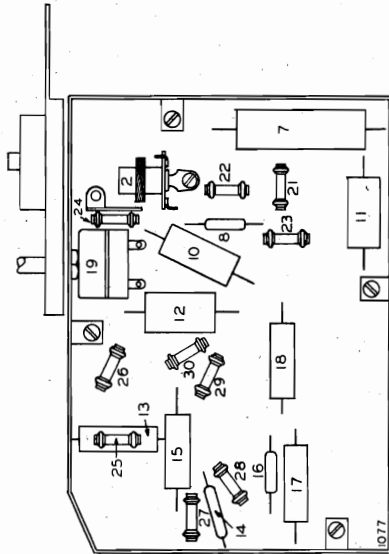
PARTS LOCATING DIAGRAM PORTABLE RADIO #985651
